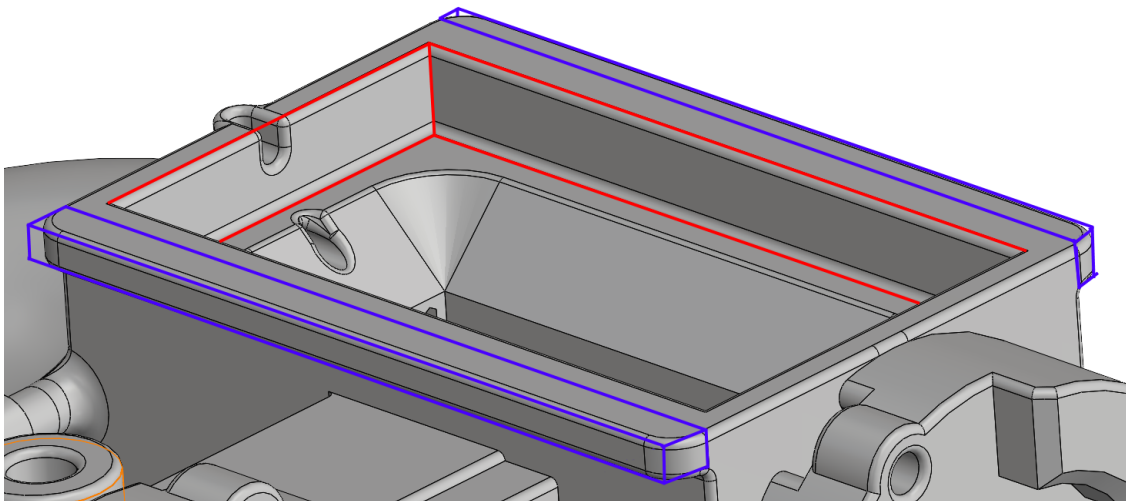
Close-up of the top part of the testing chamber. The lip is highlighted in red and the locking edge is highlighted in purple.
